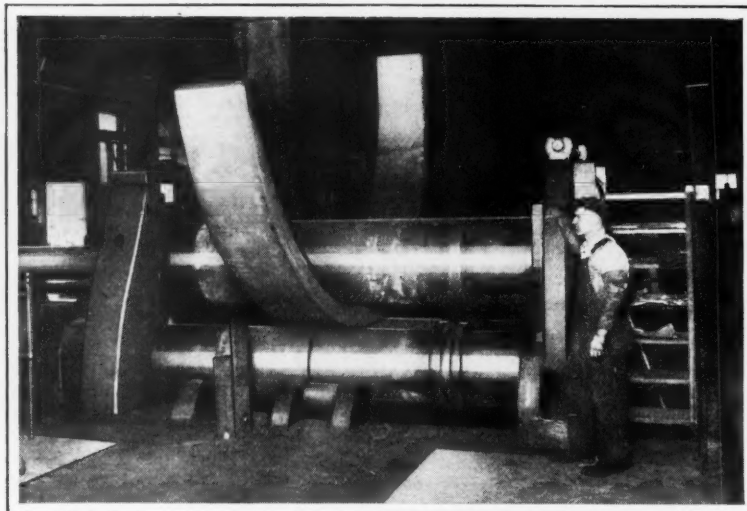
Rolling a Heavy Slab to Form a Motor Stator Frame
